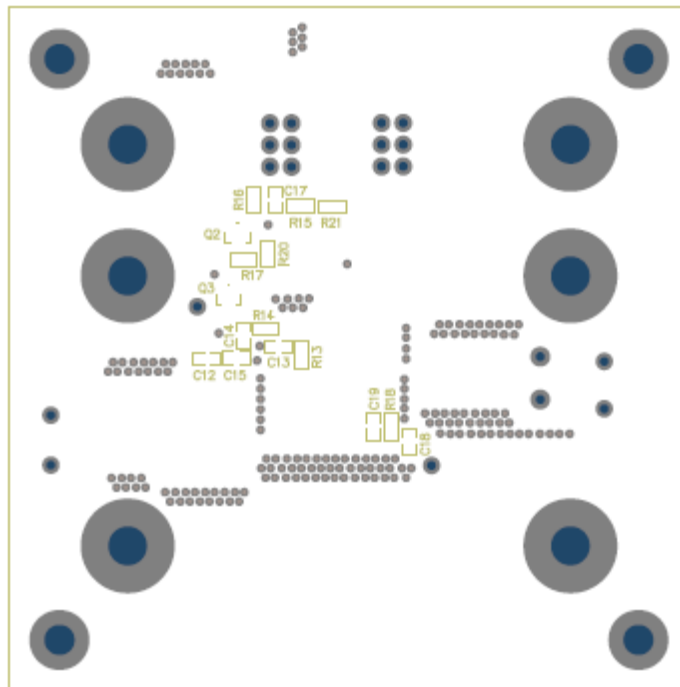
BOTTOM-OVER LAYER (COMPONENT LOCATION MIRRORED)
